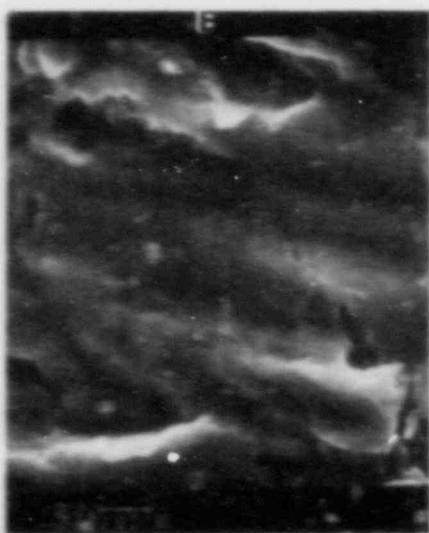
Higher Magnification Views of Fracture Surface Structure on Specimen
